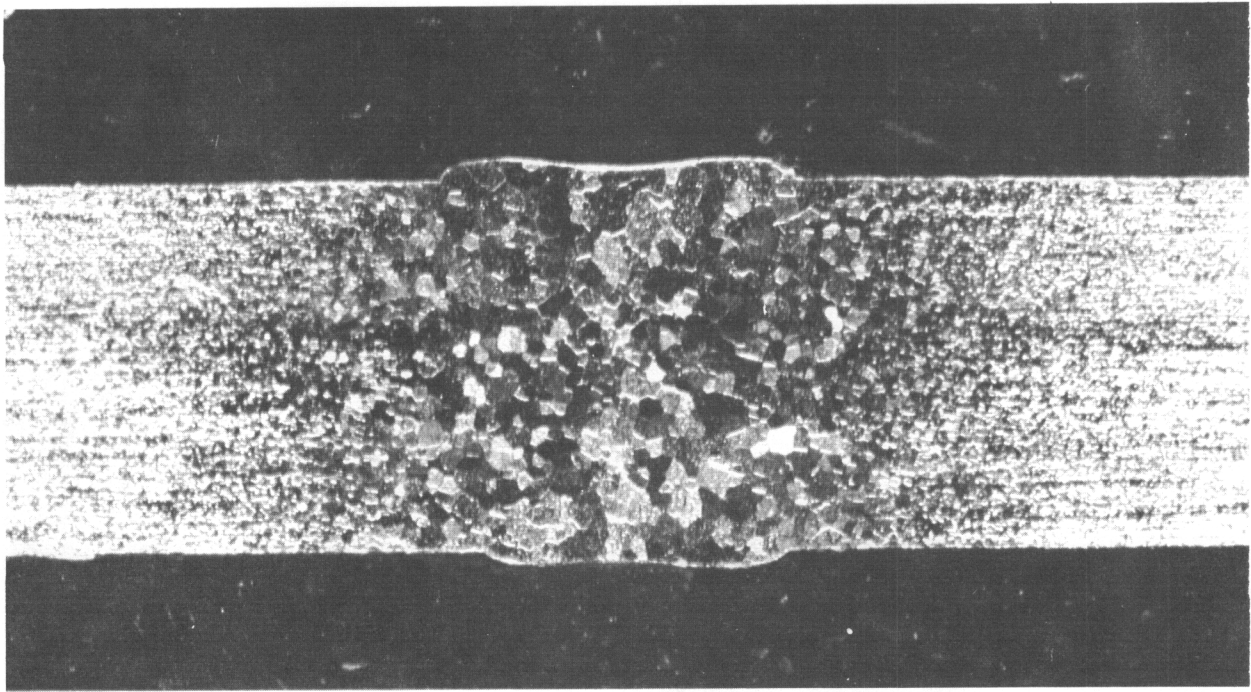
Trial Weld Cross-section; X20; 0.100-in. Mo-0.5% Ti; 115KV, 11ma, 14ipm, 0.020-in. Y oscillation
